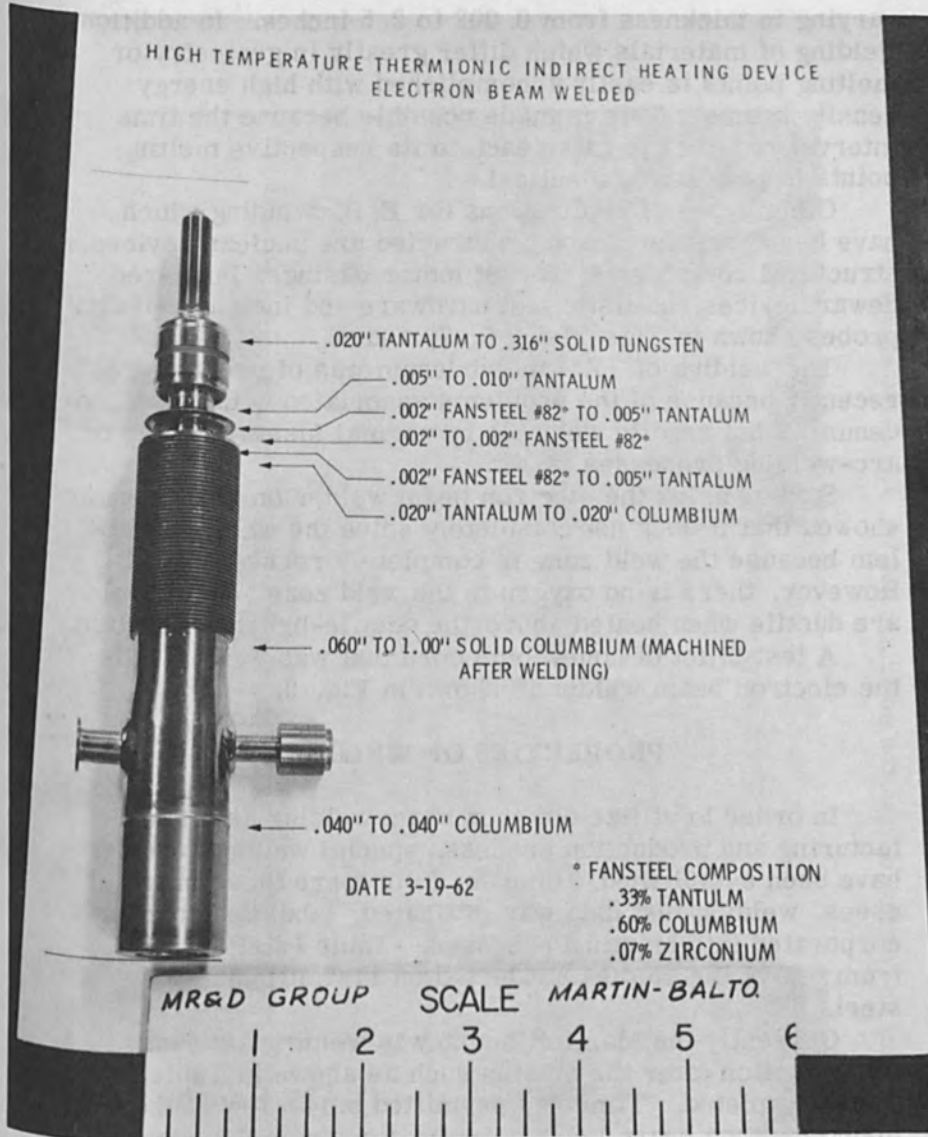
Similar and dissimilar electron beam welds produce a thermionic generator.
